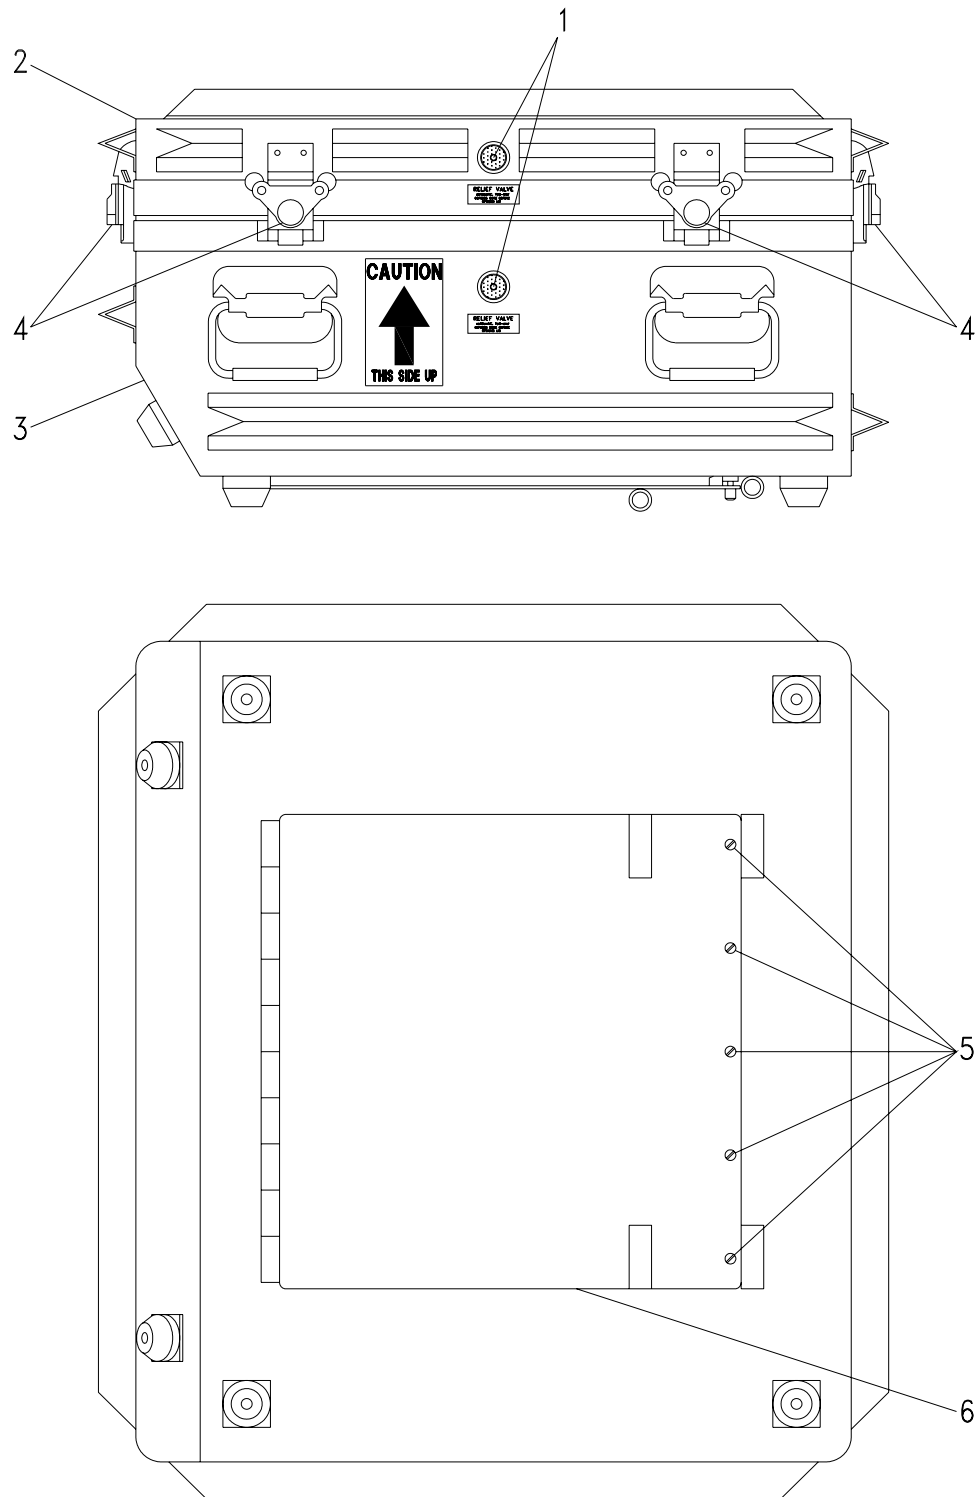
Removing/Reinstalling Control Console Panel Assembly (Sheet 1 of 3)
